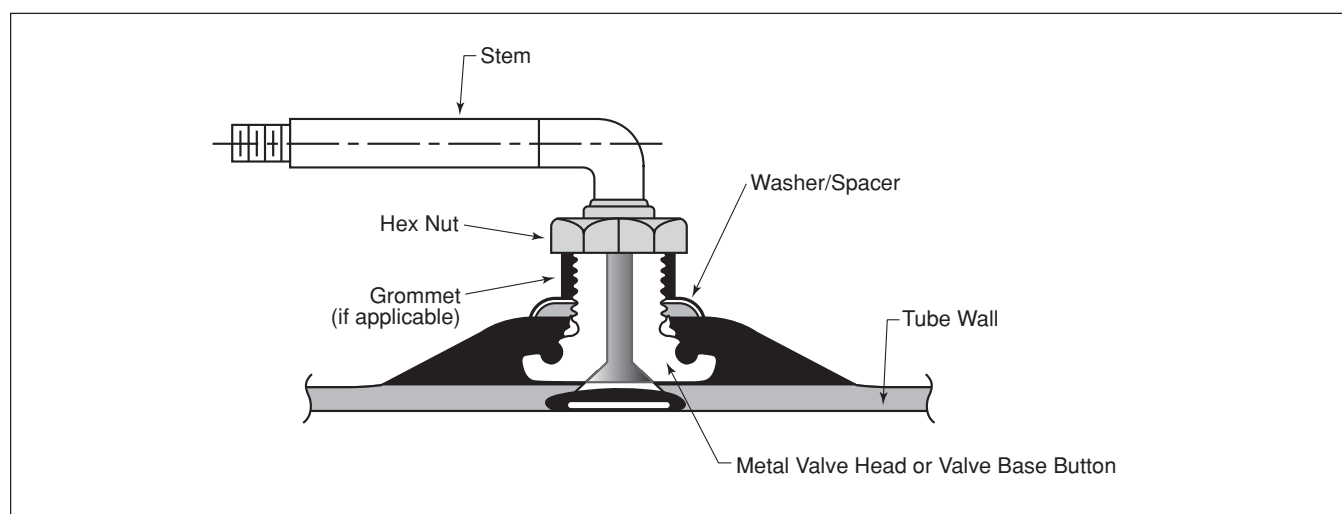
Metal Valve Stem and Inner Tube Construction
